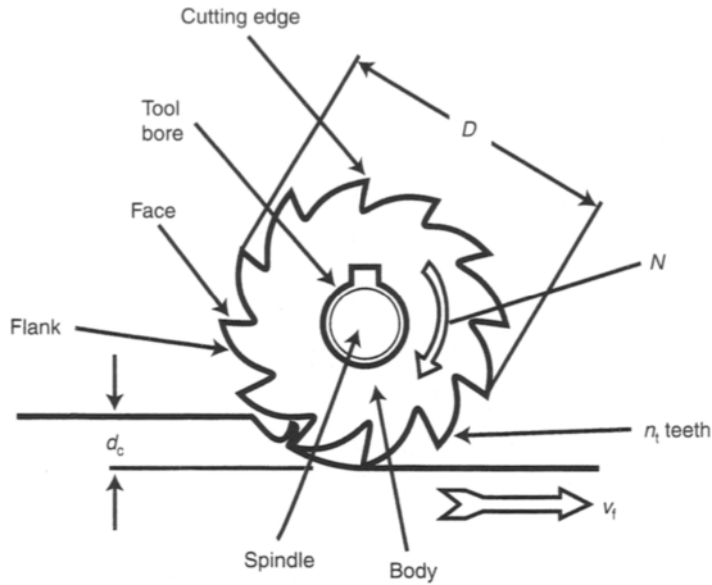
Tool-workpiece details for orthogonal milling.
